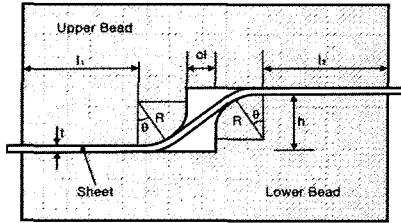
Sectional view of a stepped drawbead and a formed sheet
